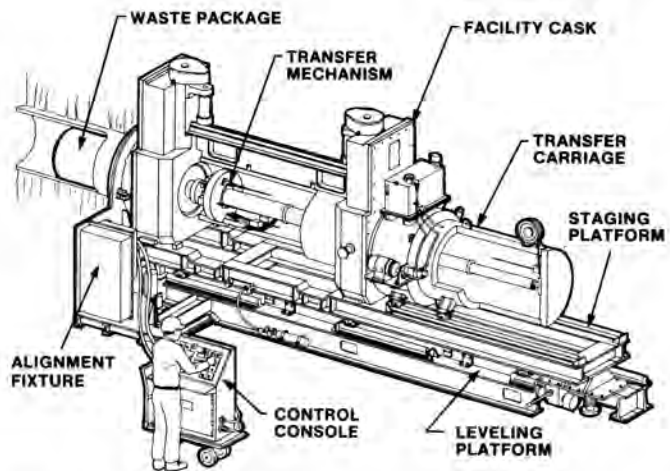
Horizontal Emplacement and Retrieval Equipment.
